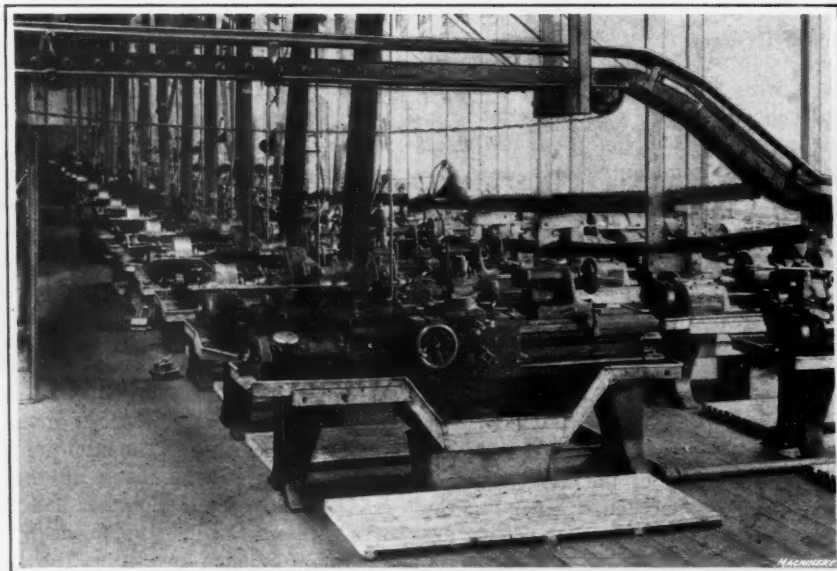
General View of a Department in the American Shell Co.'s Plant
